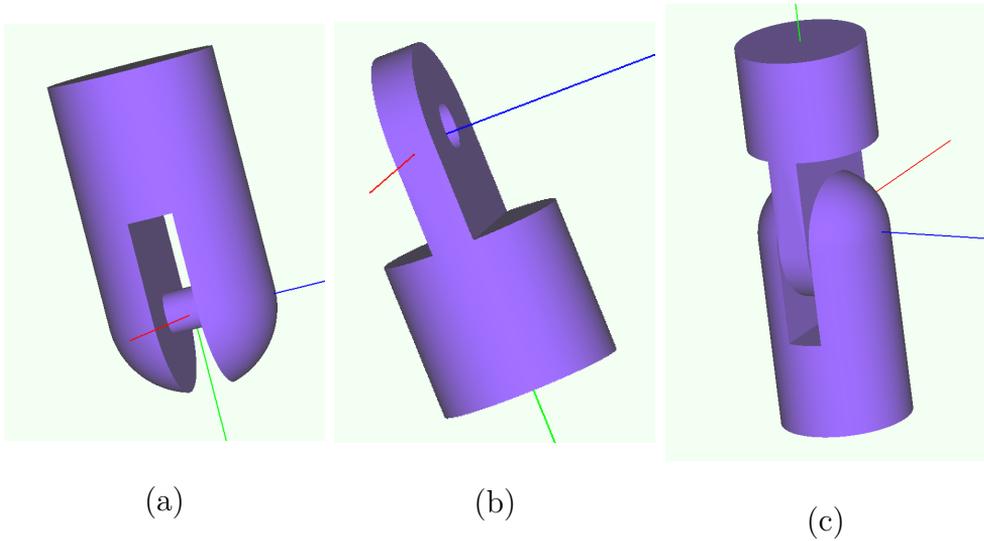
Hinge joint: (a) top part, (b) bottom part, and (c) combined.
